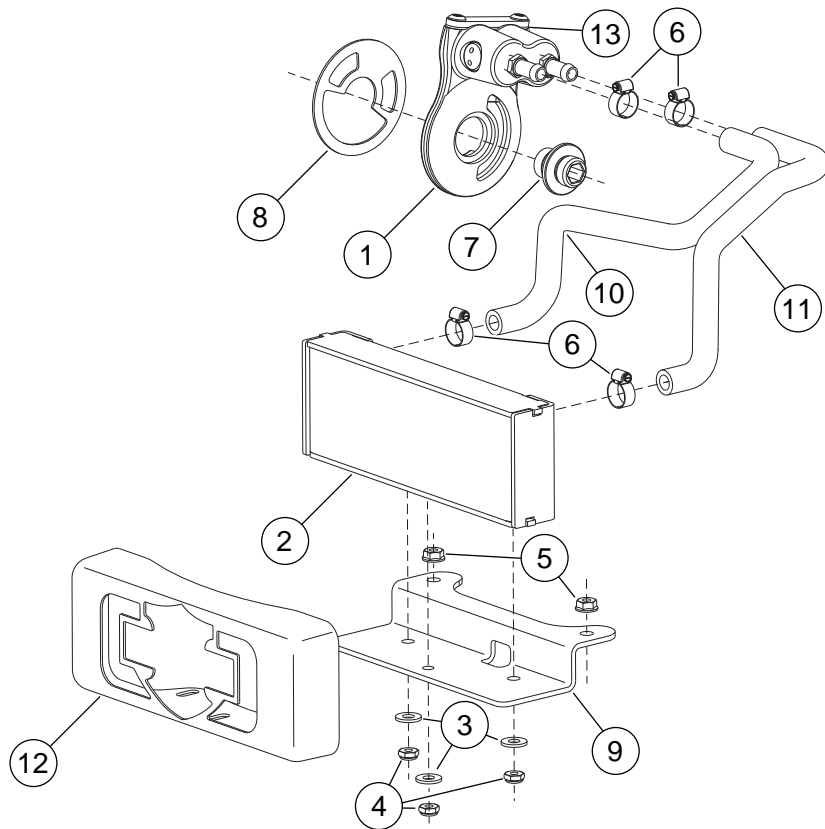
Service Parts for Touring Oil Cooler Kit with Chrome Oil Cooler Cover
